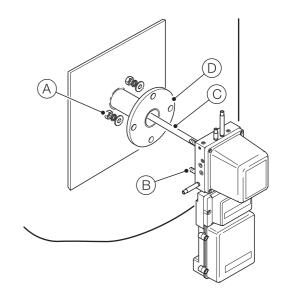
Standard temperature probe - ANSI 2 in. flange version
